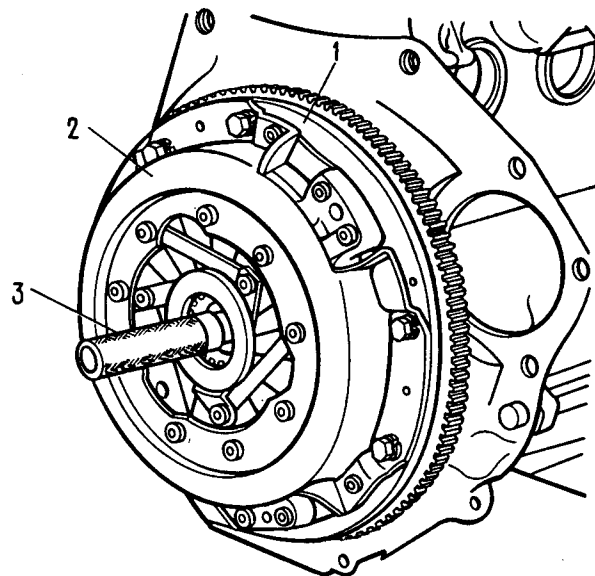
Aligning Driven Disc with Mandrel A.70081:
